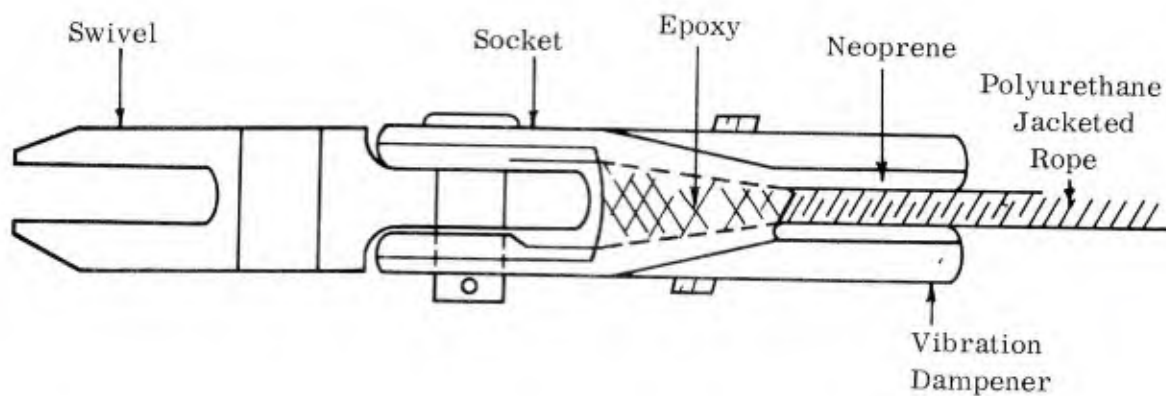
Method of Attaching Wire rope to a Terminal Swivel Socket
